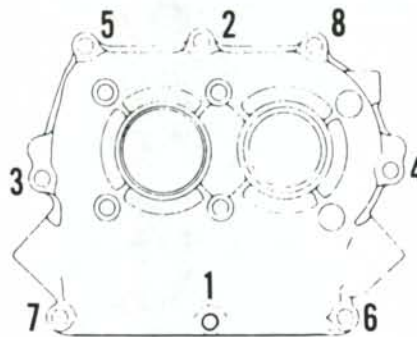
Tightening sequence for crankcase cover screws on MF260.
